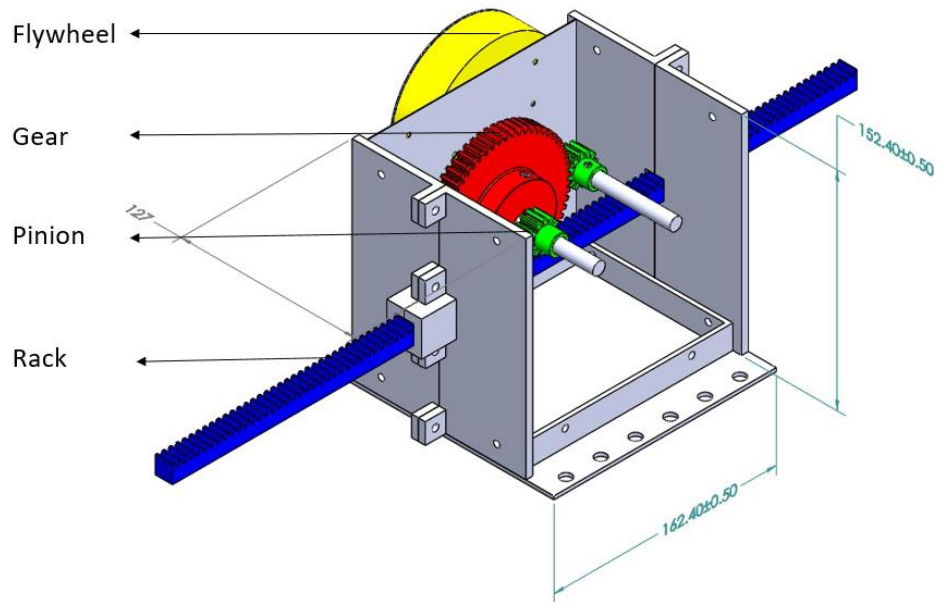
Rack-and-pinion inerter CAD model. Units: mm
